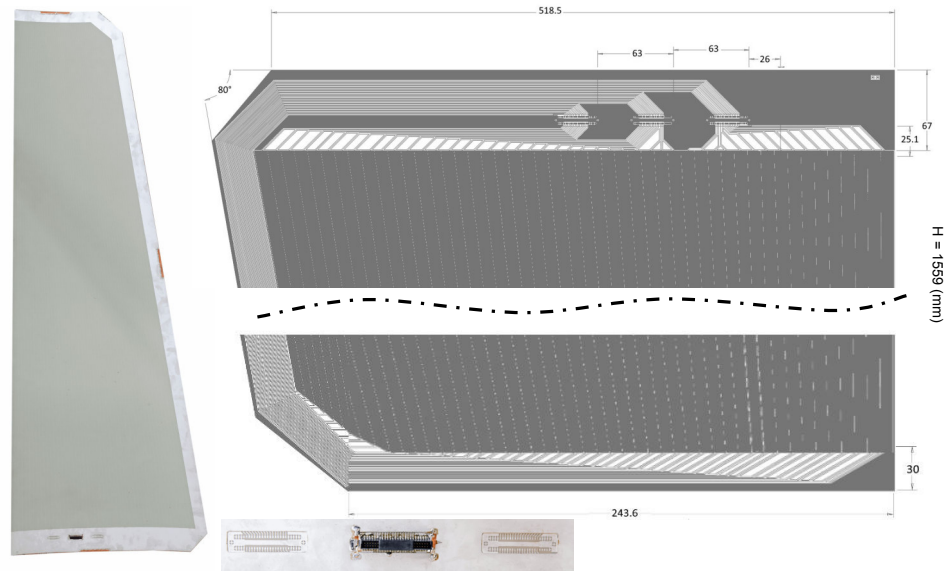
A picture of the third version of strips PCB accompanied with its schematic drawing.
